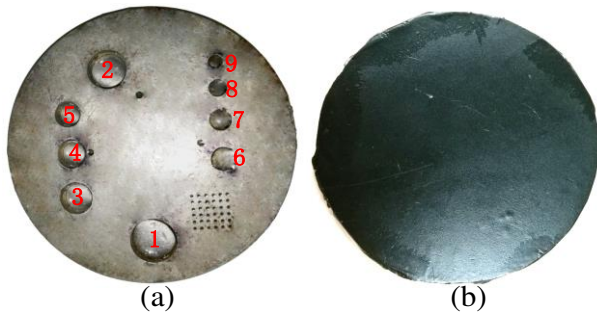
Two layers standard specimen: (a) rear side; (b) front side.
